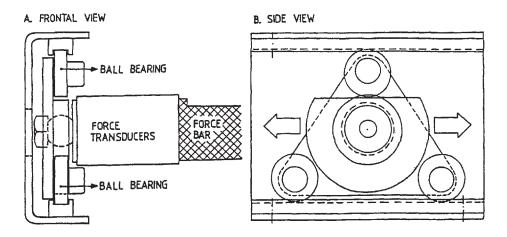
Frontal (A) and side (B) view of the force-bar construction with a bearing unit for moving transducer [39].
